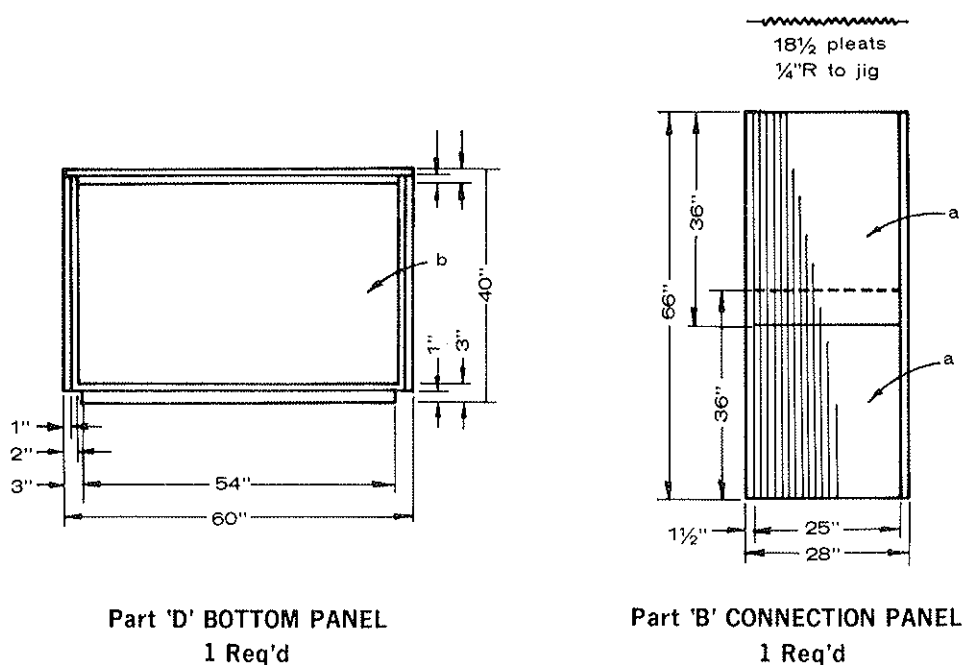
FIREPROOF BOOM PROTOTYPE - FLEXIBLE PANEL DETAILS
